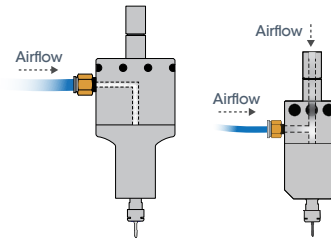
A 625JS with side or rear air inlet Air Turbine Spindle® mounting and a 650JS with side air inlet mounting.
